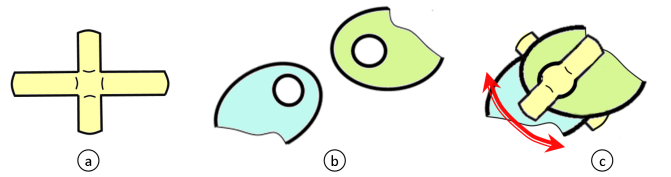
shows a cross-shape stripe (a) for connecting adjacent partitions (b) with revolute joint motion. (c) shows the complete assembly.
